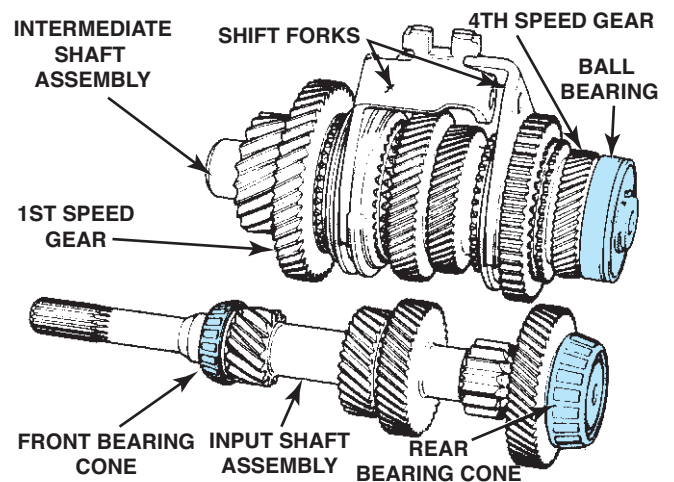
This transaxle uses a roller bearing at one end of the intermediate shaft and a ball bearing at the other end. A pair of tapered roller bearings support and locate the input shaft. (Courtesy of DaimlerChrysler Corporation)
